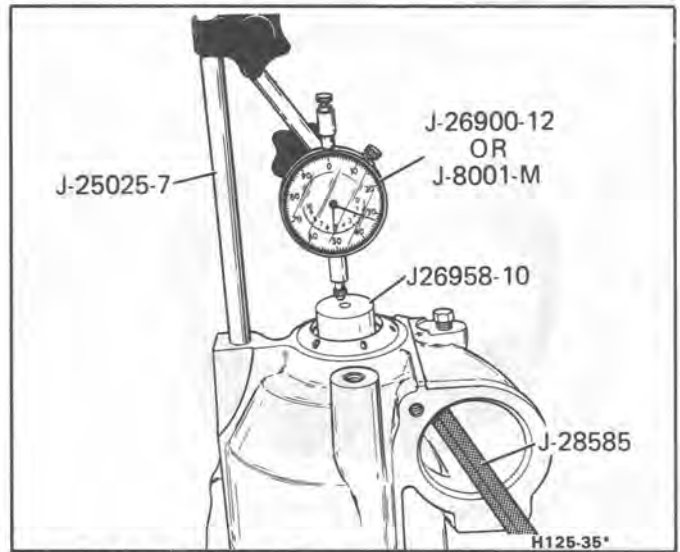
Final Drive End Play Selective Thrust Washer (680) Measurement
